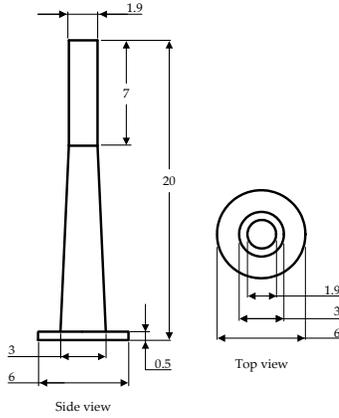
Dimensions of the dielectric rod. All the dimensions are in millimeter.
